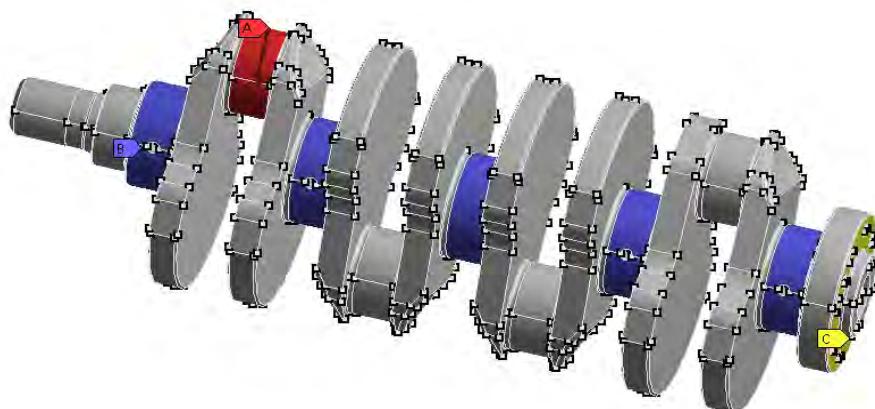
Boundary conditions applied on the crankshaft. Crankshaft main bearings are suppressed, the load 44000 N is applied on top of the crankpin surface
